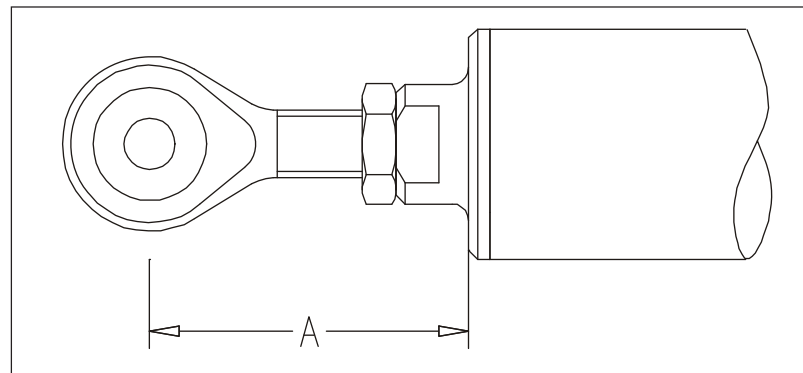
, Sheet 2 Carbon Control Rod Maximum Adjustment
